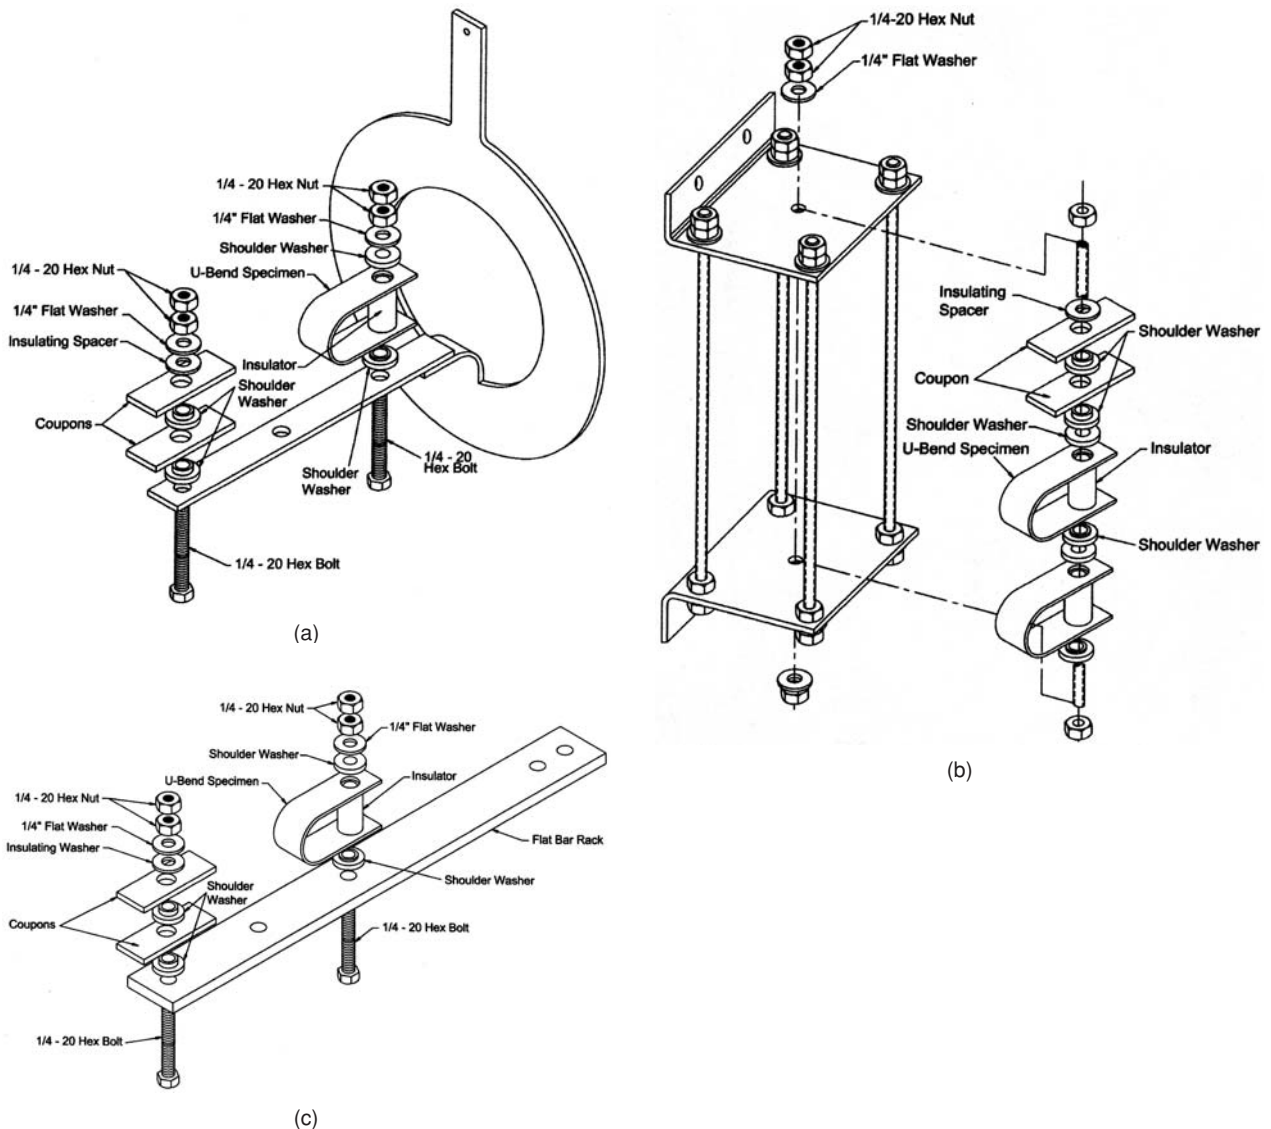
Corrosion racks used to expose corrosion samples in operating production equipment: (a) inside pipes; (b) inside process vessels; (c) to be bolted onto baffles and brackets with process vessels.
